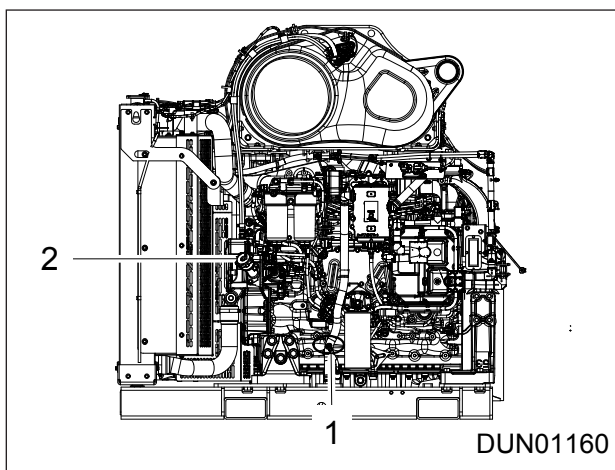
Engine Oil Filler Cap & Dipstick
